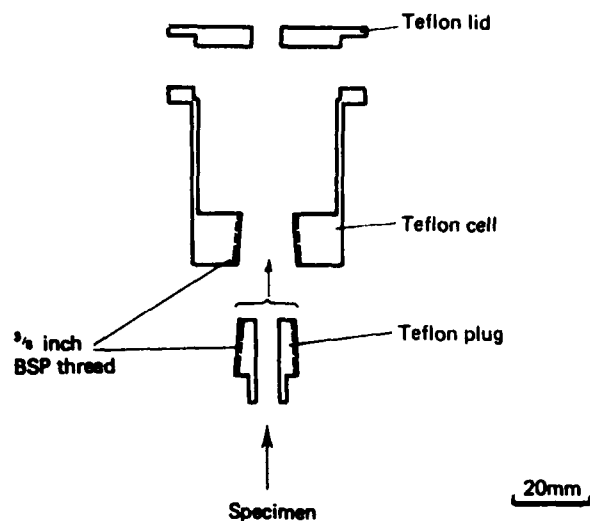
ENVIRONMENTAL CELL FOR TESTING NOTCHED STEEL SPECIMENS IN PAINT STRIPPERS.
